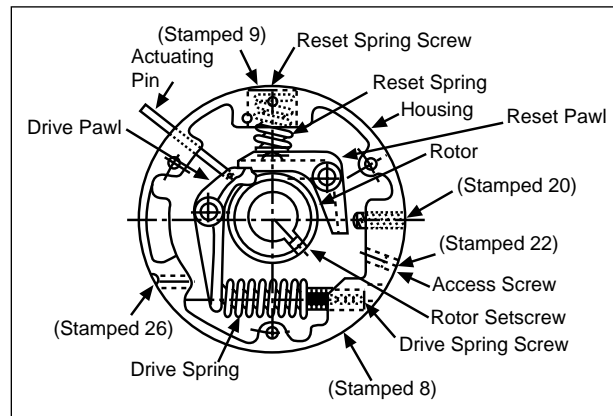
CLUTCH INTERNAL COMPONENTS
